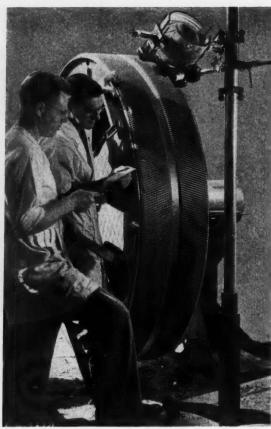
All Turbine Reduction Gears are Radiographed with this Hendy-Built Portable X-Ray Machine Before Being Released for Installation
